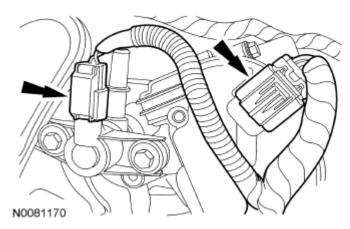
Locating EGR Valve Electrical Connector Courtesy of FORD MOTOR CO.
